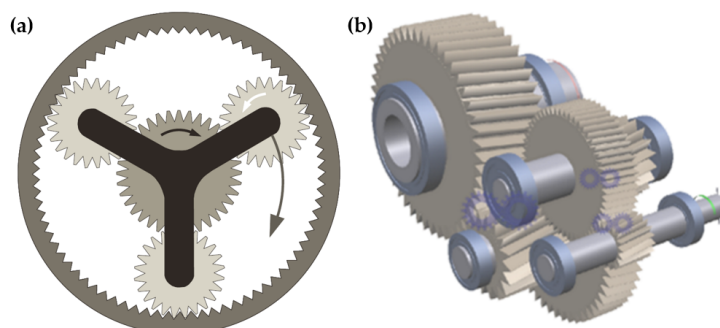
Schematic of (a) a planetary gear set and (b) a multi-stage gear set.
